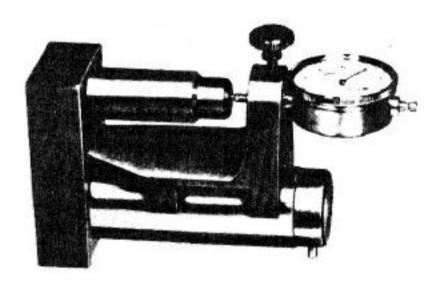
Dial gauge on setting block, set to zero with 1-mm (.040-in.) preload.
